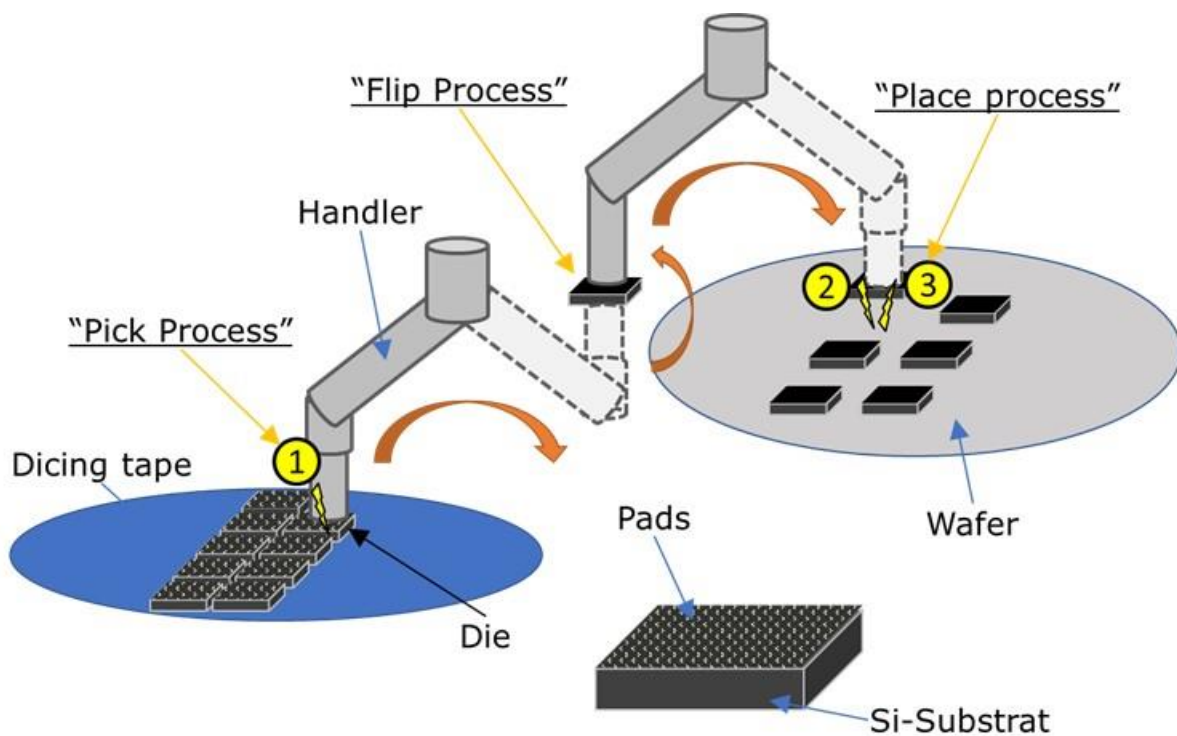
Discharging Risk During Die-to-Wafer Assembly
